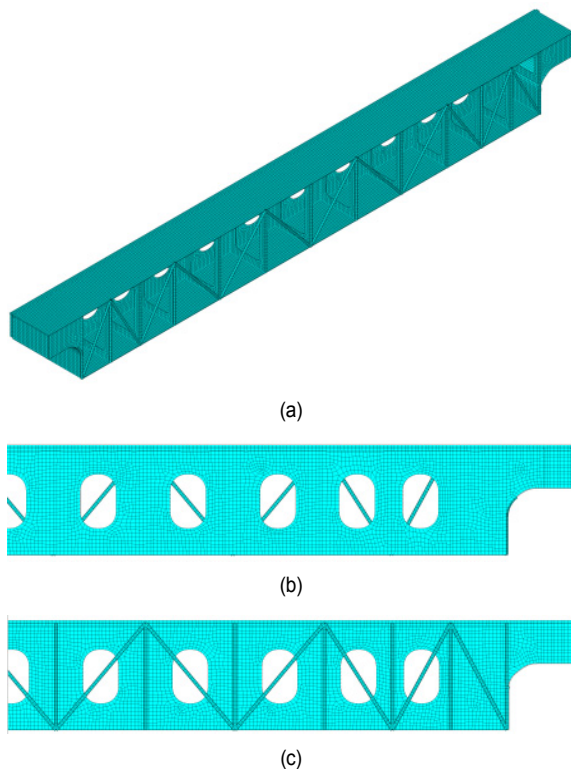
New unsymmetrical complex plate shell structure model: (a) overall drawing; (b) local detail drawing of main web side; (c) local detail drawing of auxiliary web side.
